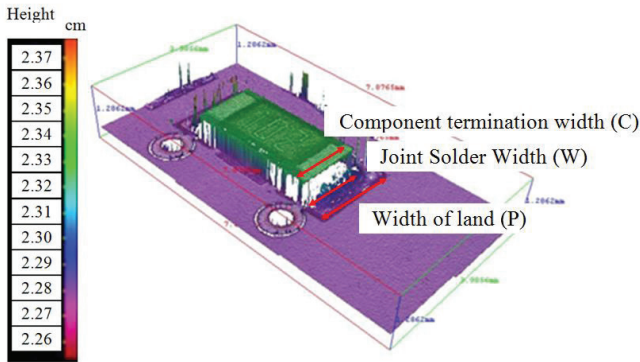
Example of visual inspection of self-alignment in accordance to IPC-A-610E
